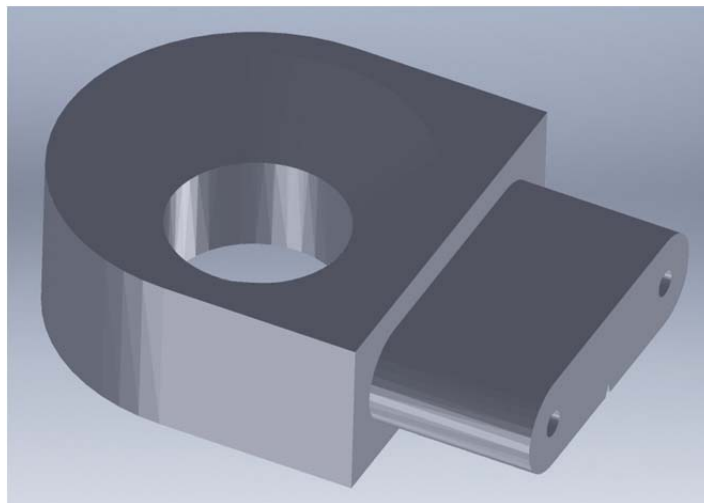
Solid Model of the mounting plug. This plug will be inserted into the unused power slots in the power supply module and the lighting module. Once inserted, the hole in the plug will be used for a screw to mount the module.
